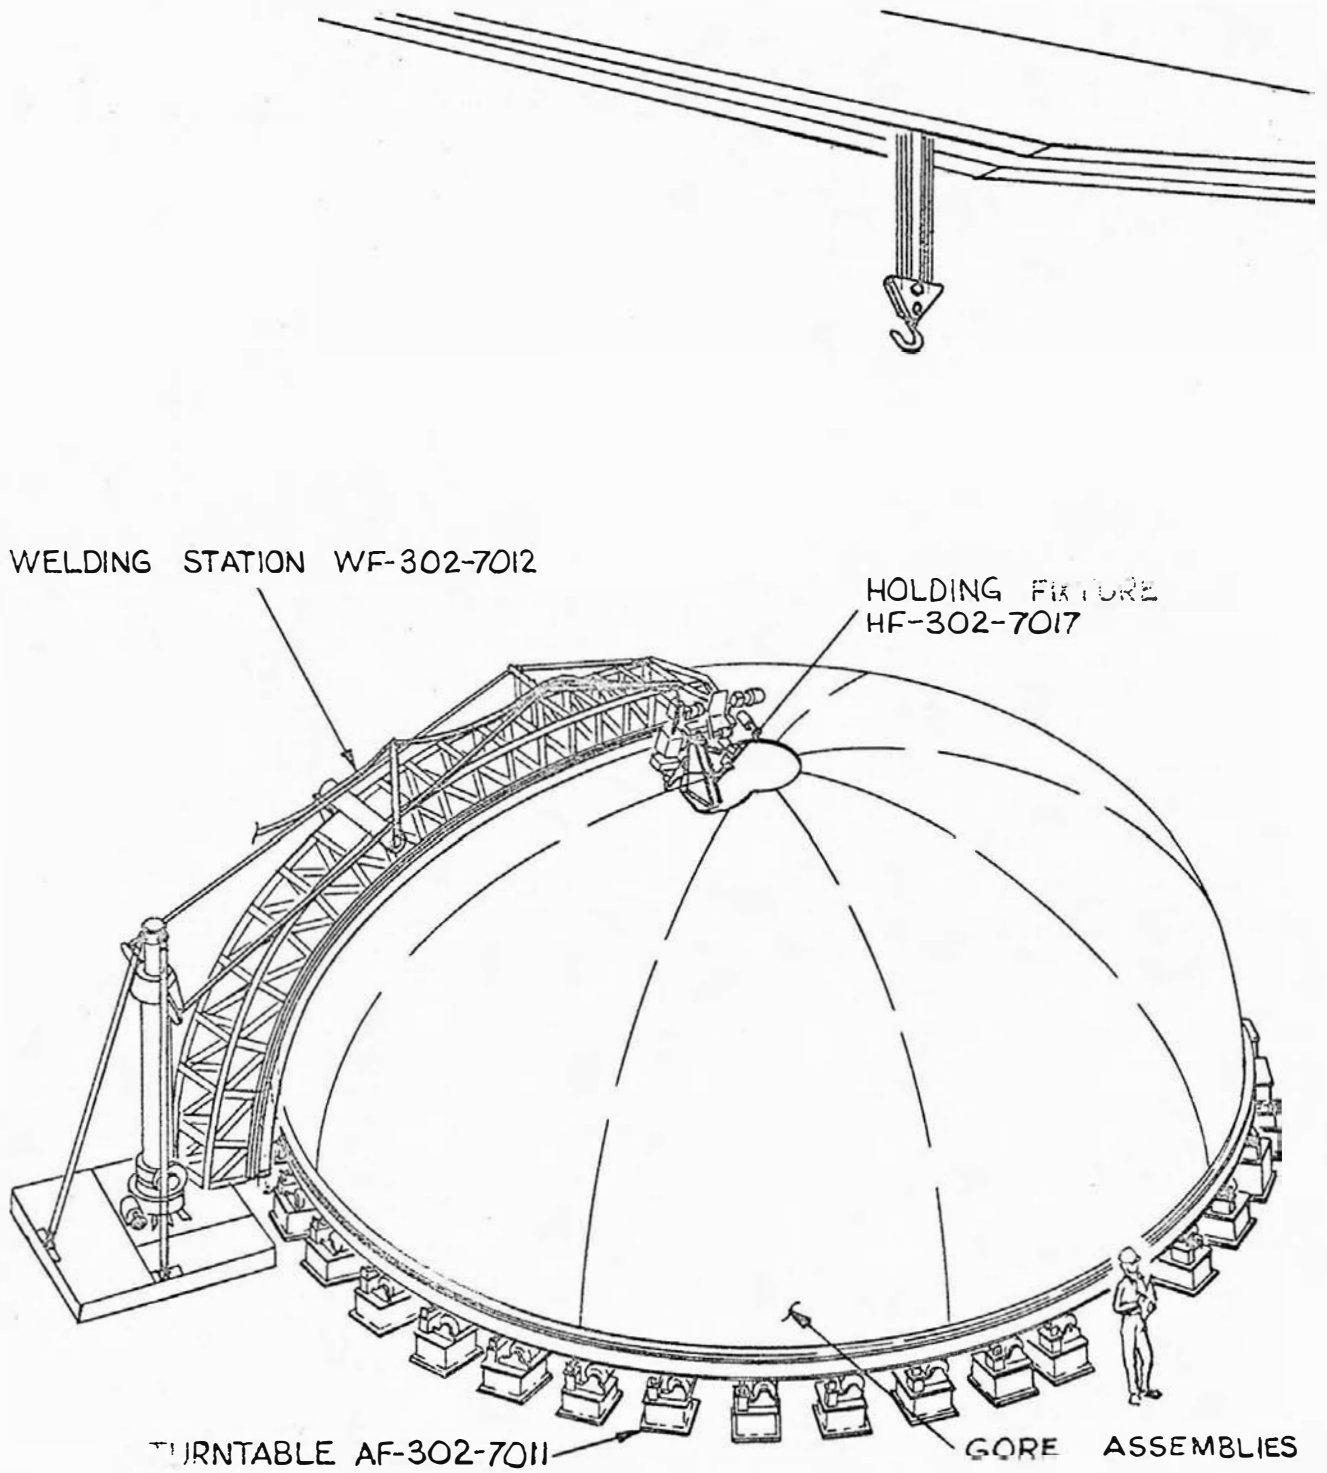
Welding Gore Assemblies to Form Head Assembly
